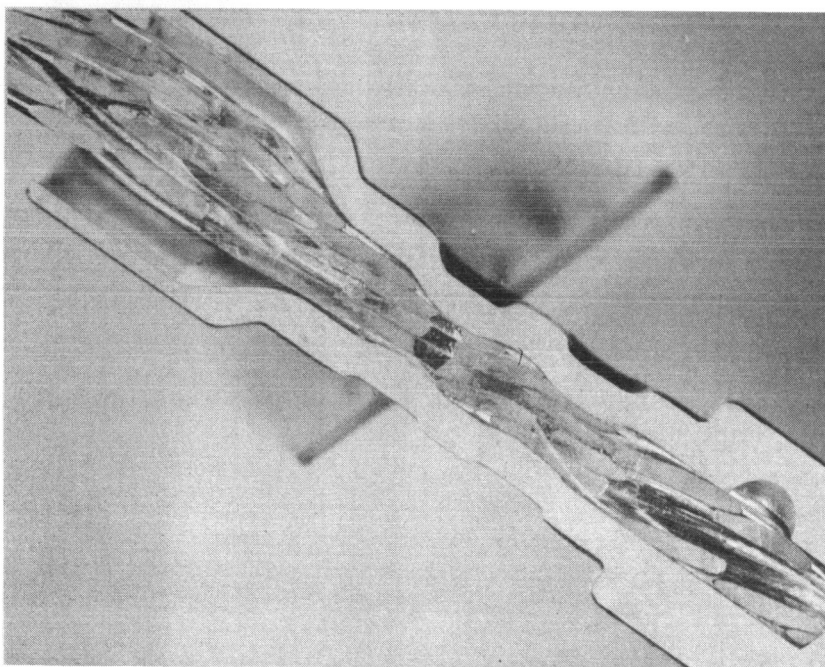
CESO-20-DO46-20 Section View of Crimped Contact
